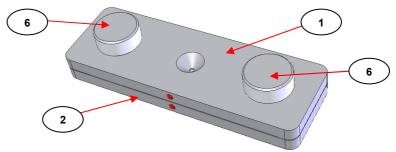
Correct DC-3 Assembly (Upper Plate Top View)
